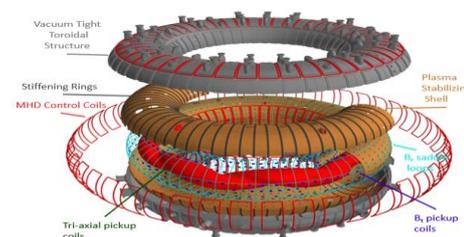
Exploded layout of the RFX-mod2 assembly..
